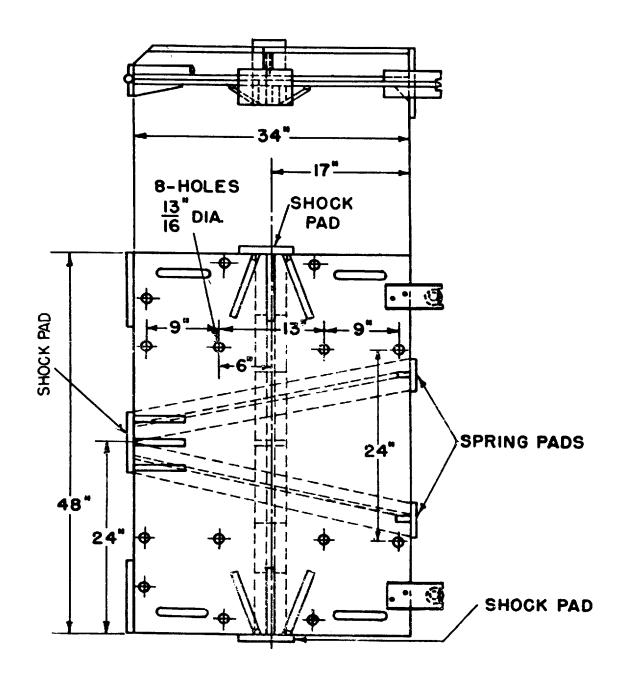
ANVIL PLATE OF SHOCK-TESTING MACHINE FOR LIGHTWEIGHT EQUIPMENT
